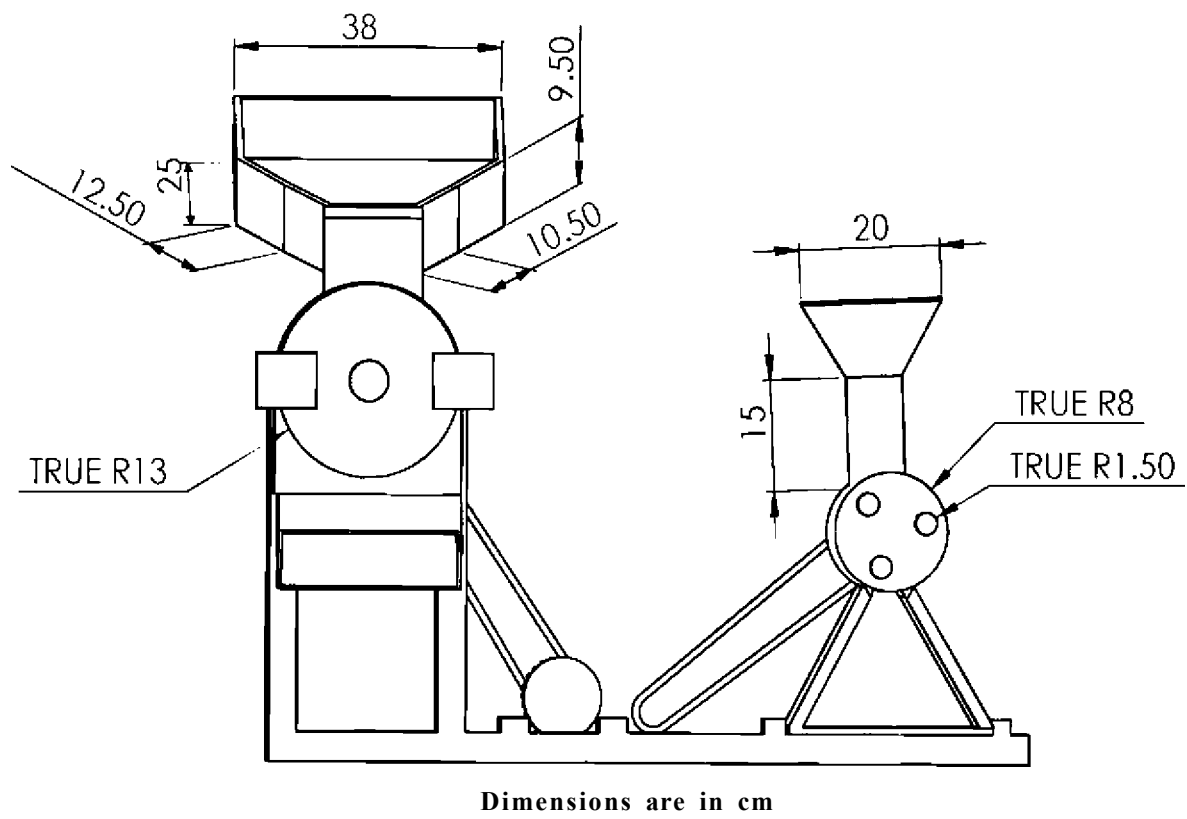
Isometric view of shredder cum Briquetting Machine
